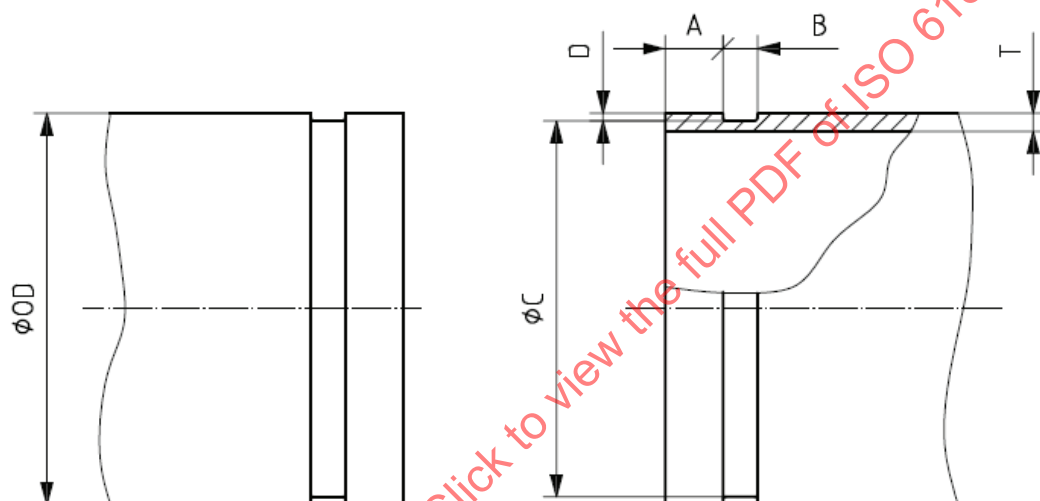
Cut grooved-end dimensional reference points from Table 2
